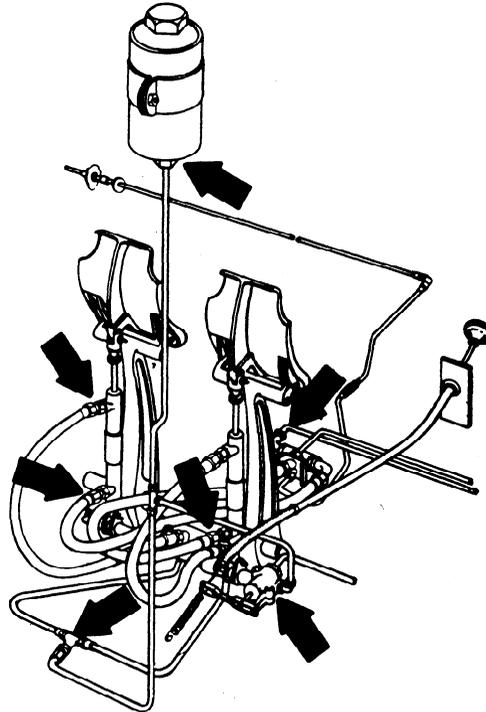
Cockpit-hydraulic brake line checkpoints.
